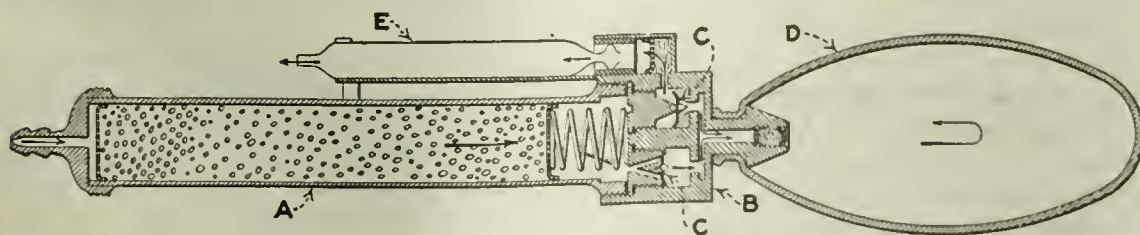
LONGITUDINAL SECTION SHOWING CONSTRUCTION OF DEVICE
